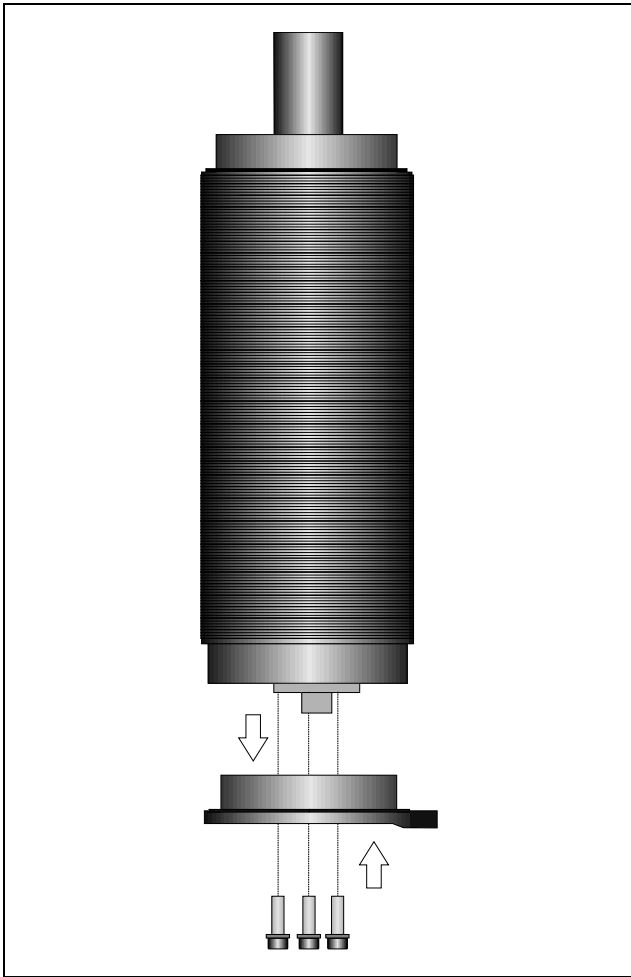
Preassembling the pressure channel, segmented element and centre flange
